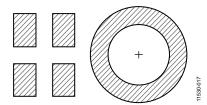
Example PCB Land Pattern with No Enclosing Ring
